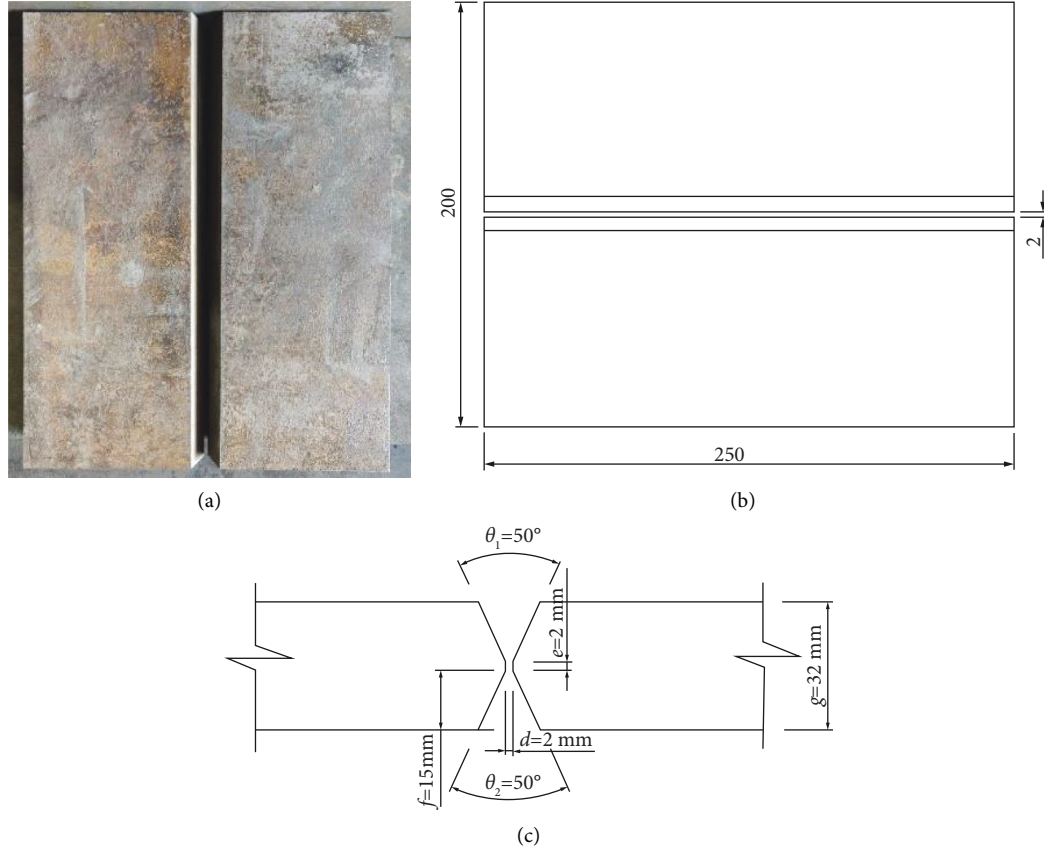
Geometry and dimensions (unit: mm). (a) Specimen. (b) Plane view. (c) Groove details.
